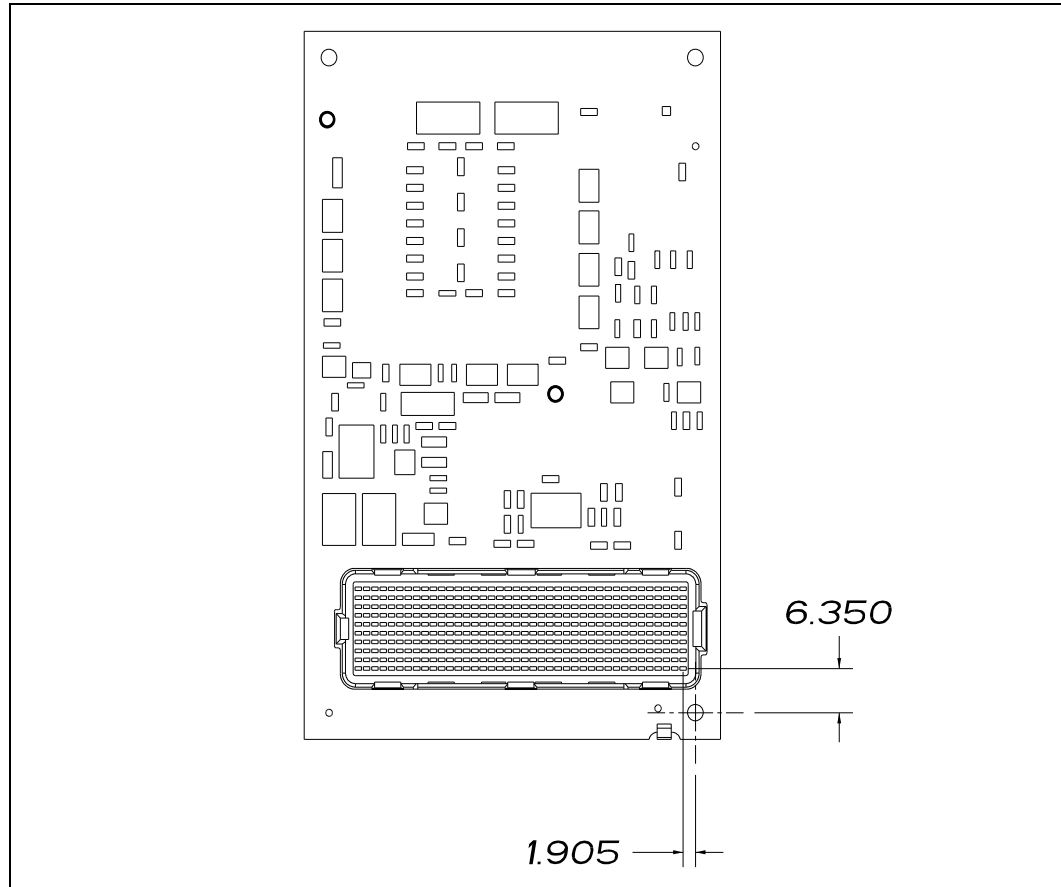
Board Dimensions with 400-Pin Connector Orientation
